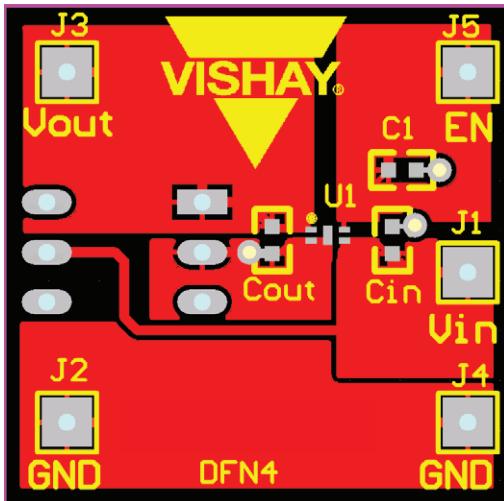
Top, TDFN4 1.2 mm x 1.6 mm PCB Layout
